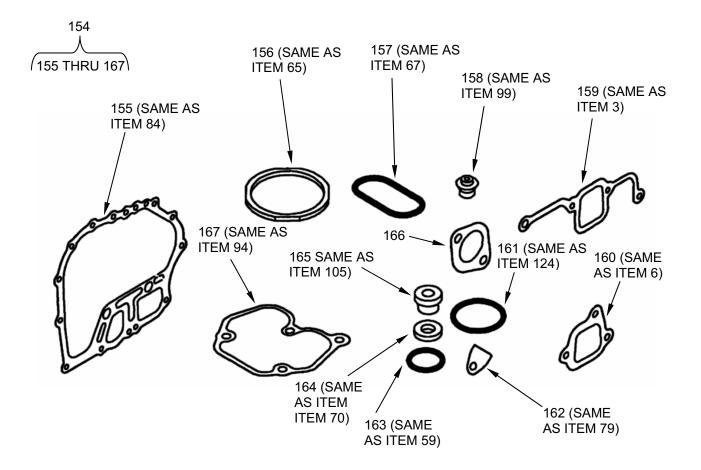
Engine, Diesel (Sheet 9 of 9) (Gasket Set).
